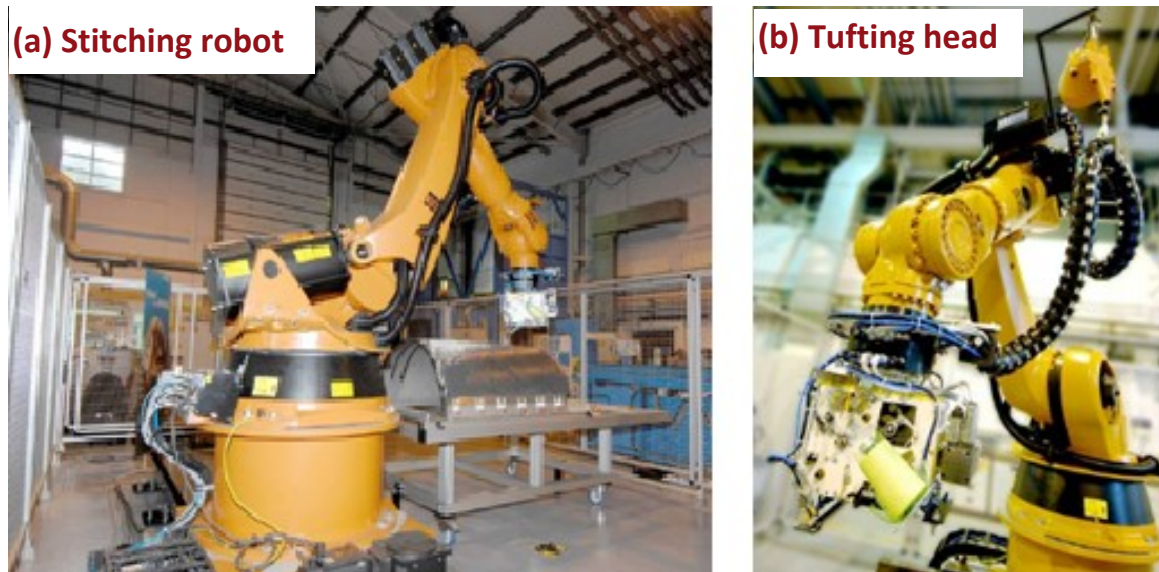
(a) Stitching robot and (b) tufting head used in QinetiQ Company [73].
